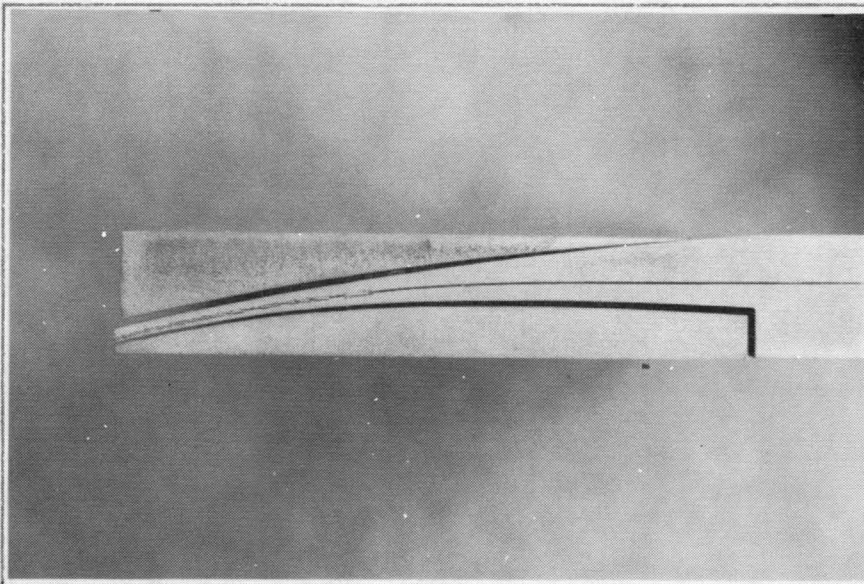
DS2 A&B after brazing to form MG13 and EDM wire cutting to give segment 5M
